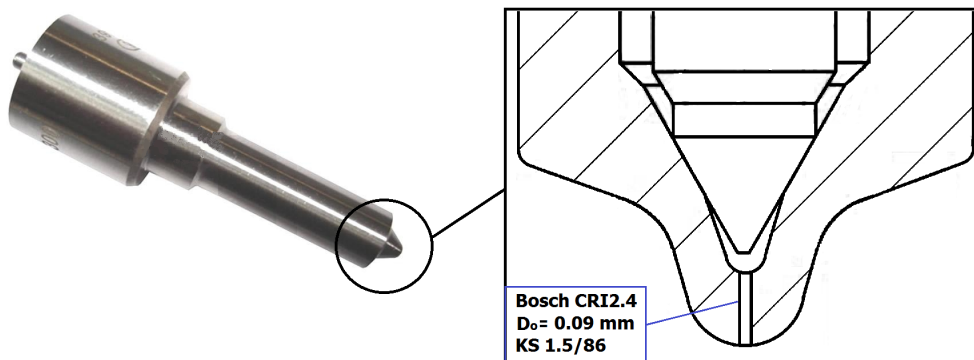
Picture of the injector and technical drawing of the tip of the single-hole nozzle used in the experiments (source Bosch).
